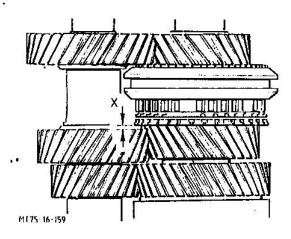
Distance "X" between countershaft gear and synchronizer cone on 3rd gear cog.
